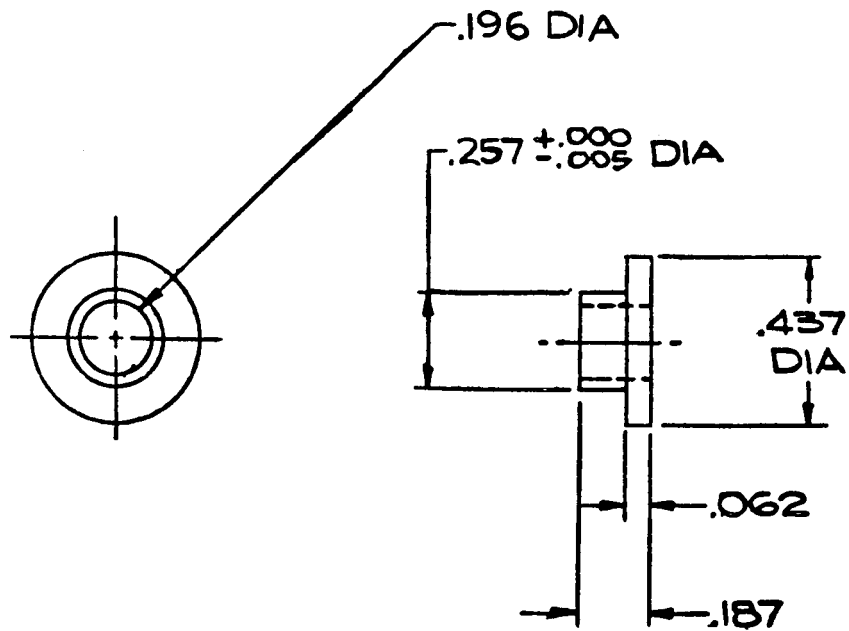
B. PLASTIC WASHER FOR C-RING STRESS CORROSION ASSEMBLY
